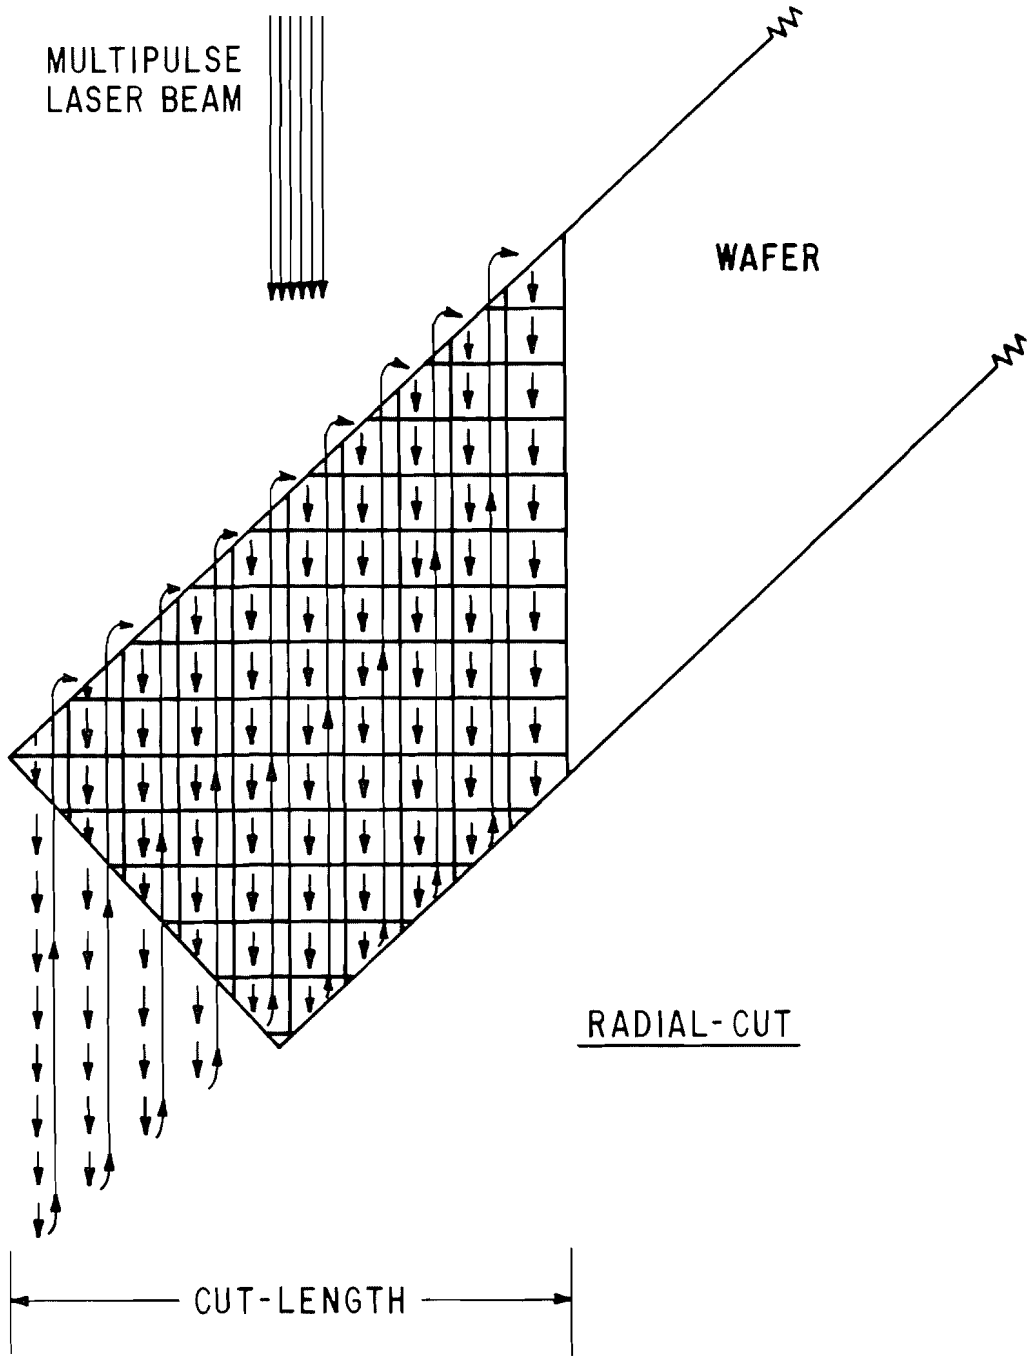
A schematic cross-sectional diagram of a laser cutting a radial cut through a wafer at a 45° angle to the laser beam (RADIAL-CUT).
